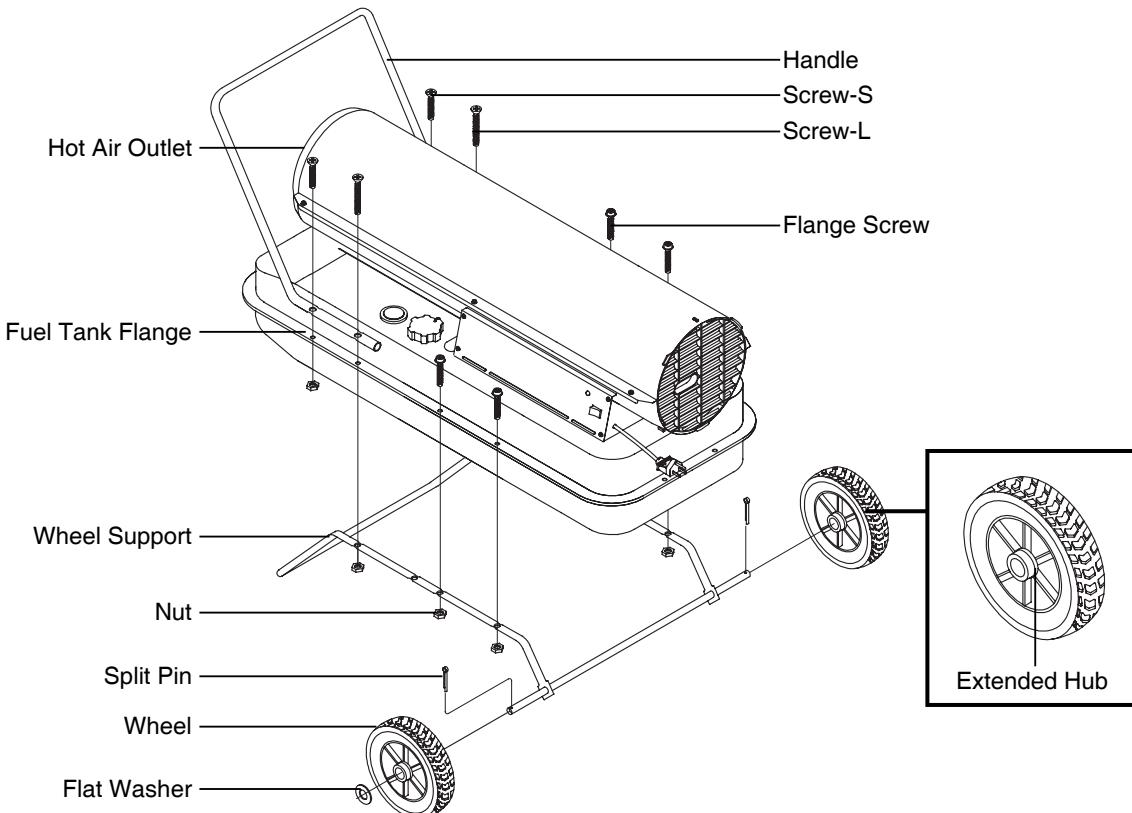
Wheel and Handle Assembly, DFA-125 MODEL
